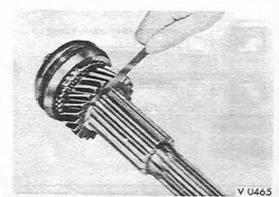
Measuring the clearance in the axial direction of the second speed gear with feeler gauge.
